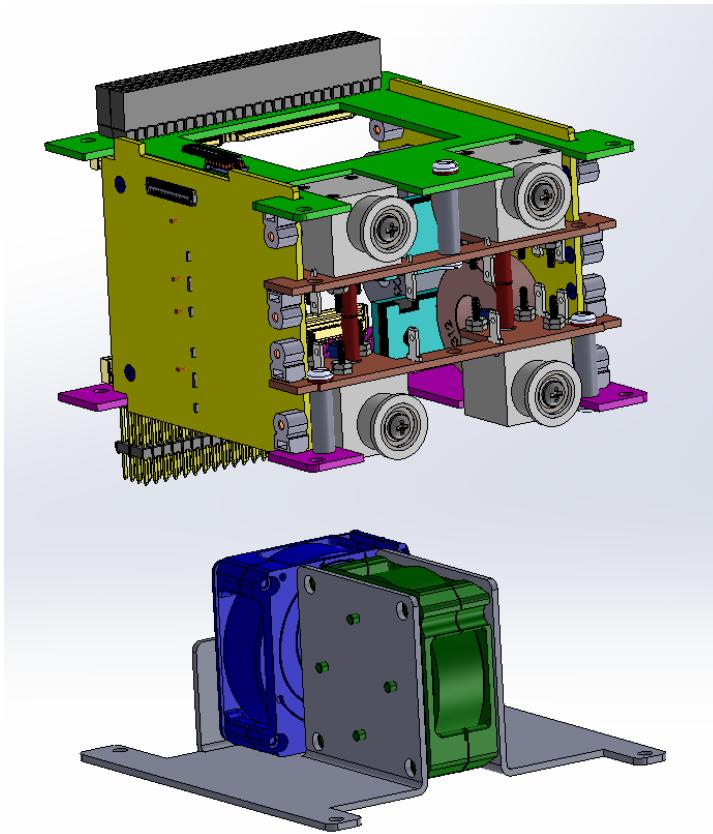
The μ CAT Sub-System should slide over the Bottom Motor Mount with Blue and Green Motors.
